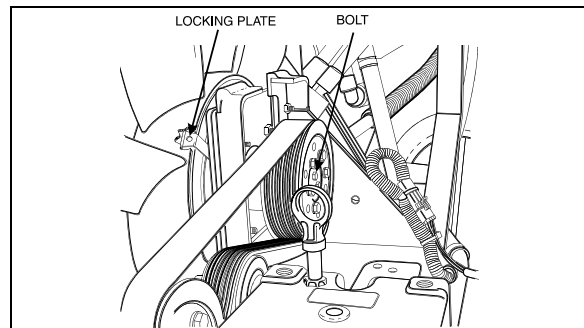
MECHANICAL LOCKING DEVICE 05061
